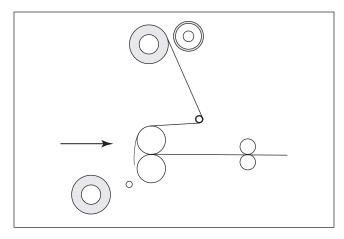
Top Film Draped Over the Top Heat Roller.
